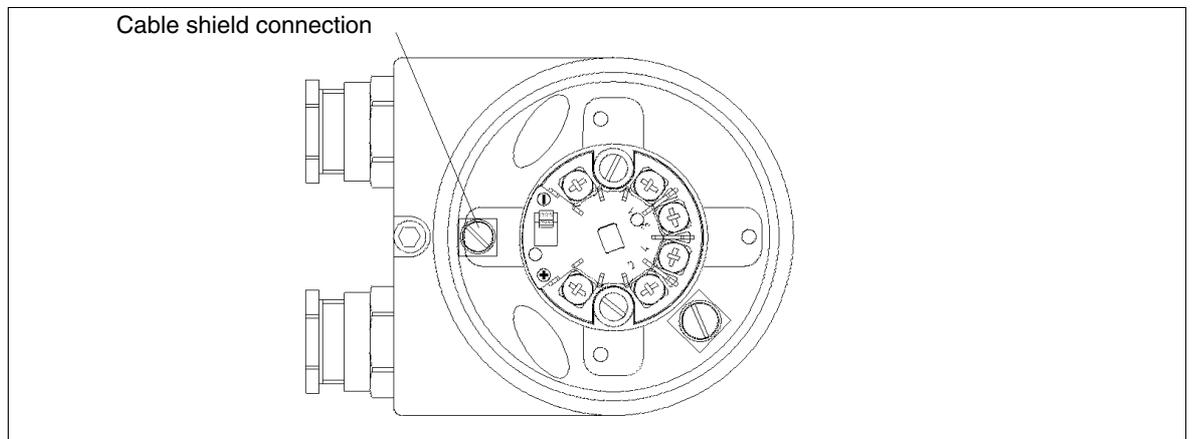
Top view open field housing TF202 / TF202-Ex
